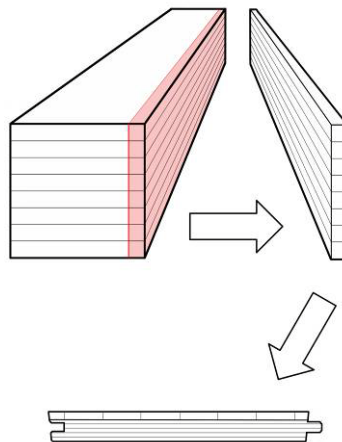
Resawn laminated beam, adhered to plywood substrate.
